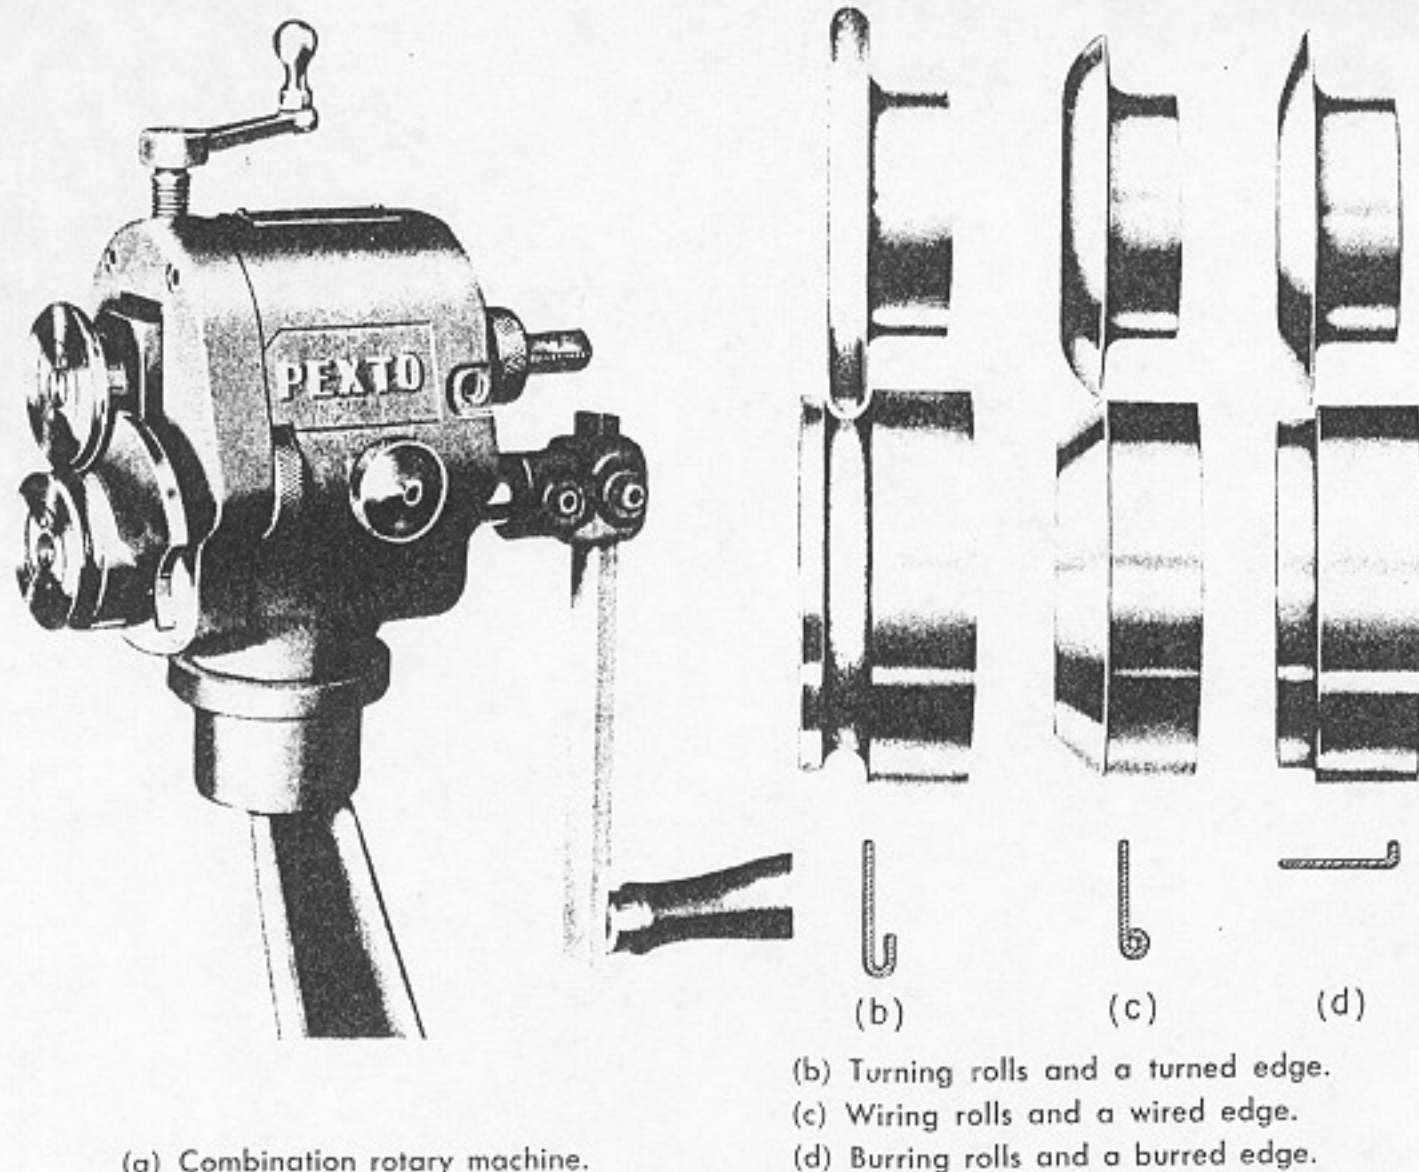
Combination rotary machine for turning, wiring, and burring the edges of sheet metal. (Courtesy Peck, Stow and Wilcox Co.)
